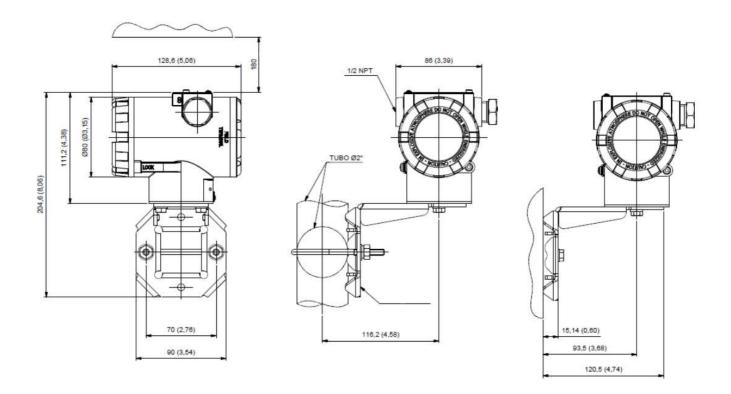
Dimensional and mounting drawings for VTT10-FH.
